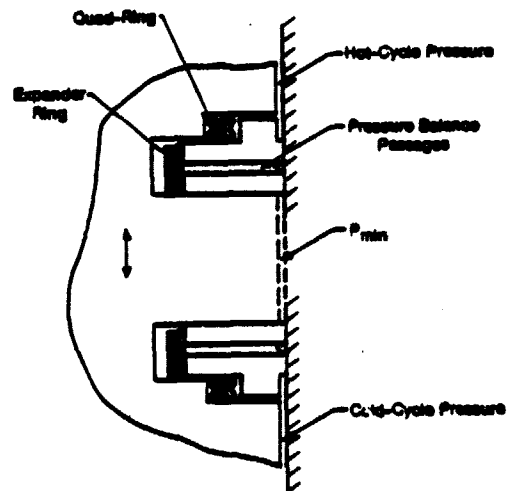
L-Shaped H-Rings (Quad-Ring Retention) - Two Rings/Piston
